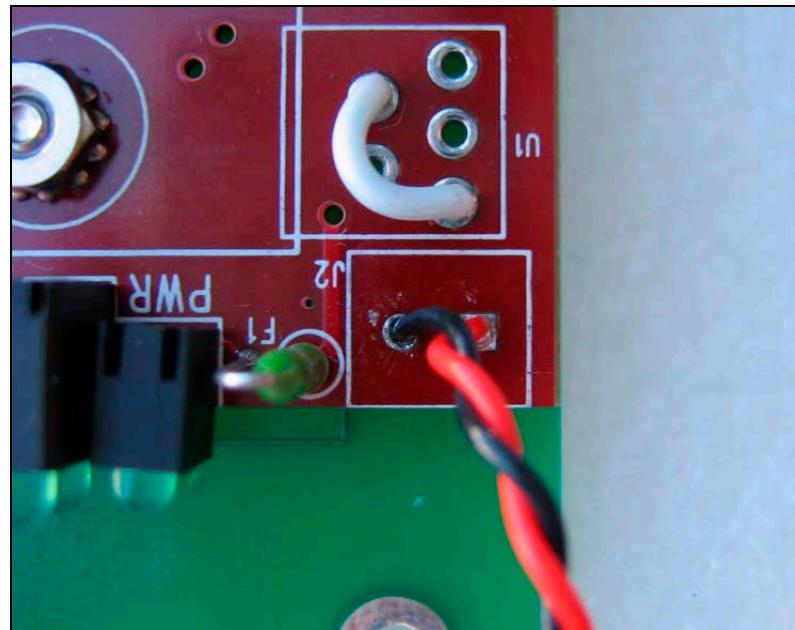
Assembled power connector leads soldered to FO module power pads.
